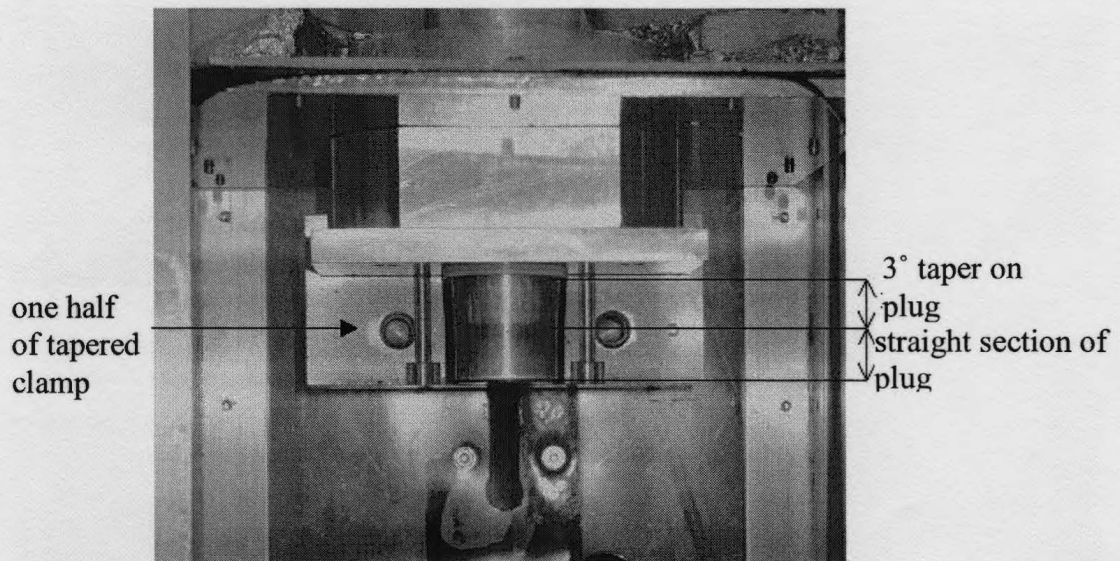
Exposed tapered geometry of cylindrical plug between which tube was sealed (prior to tube assembly).
